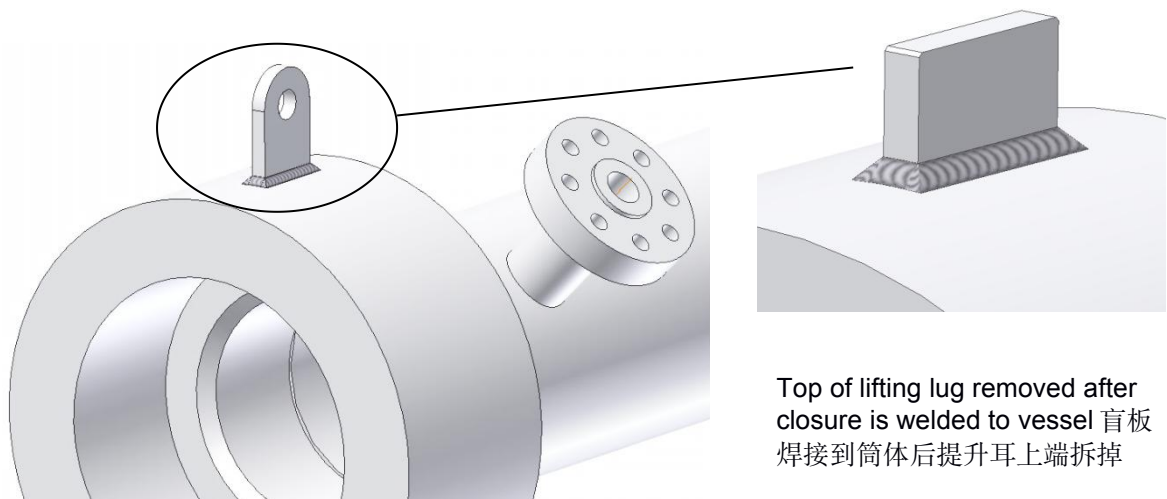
Removal of Lifting Lug (提升耳的拆除)
